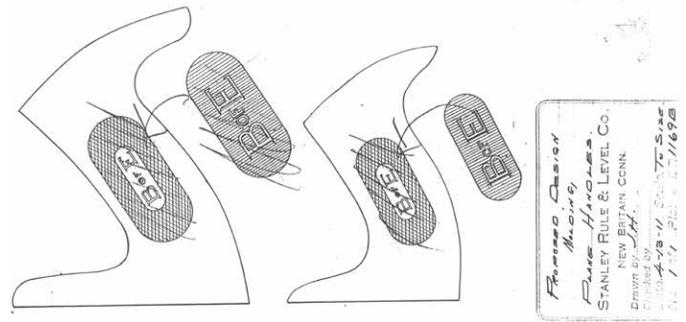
A proposed design drawing of the Board of Education Handles, dated April 4th, 1911.
